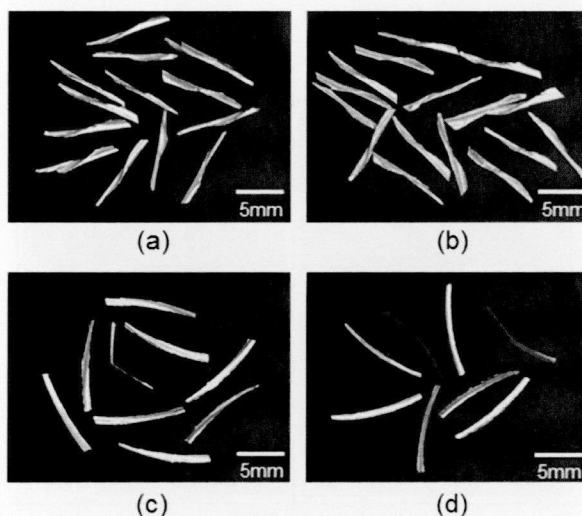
Type of chip after milling test, (a) DLC on rake and flank faces, (b) DLC on rake face, (c) DLC on flank face, (d) uncoated (workpiece: A5052).
